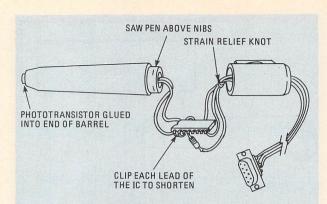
ASSEMBLY OF COMPONENTS. Note that the points on the IC are wired point-to-point with short lengths of wire.
